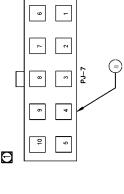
SWITCH SKIP FILL AND HARNESS ASSEMBLY (P/N 86521)
